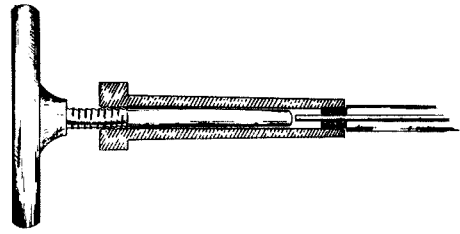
The pusher adapter is threaded to the screw end before turning the handle to put the central pin into its definite position.
